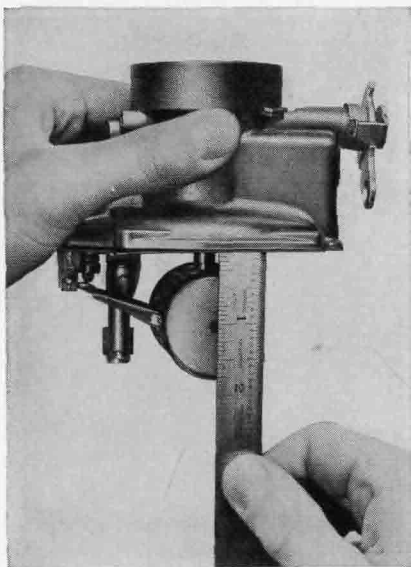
Checking float drop. Cover assembly turned right side up. (Chevrolet Motor Division of General Motors Corporation)
